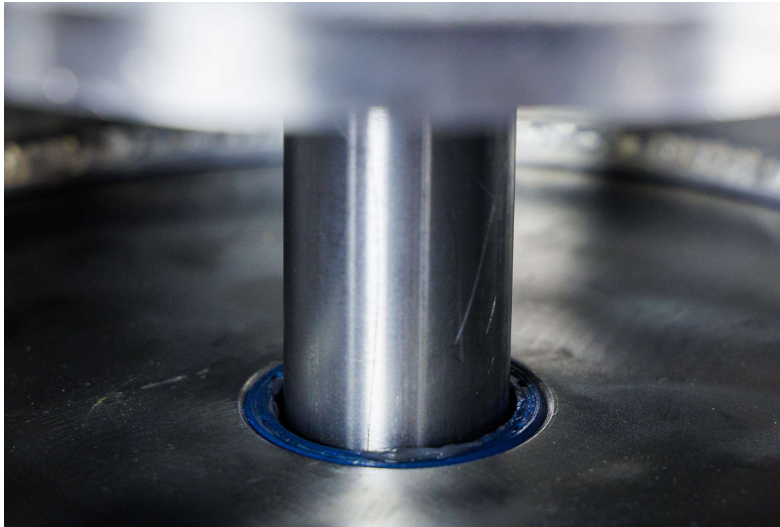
Close-up of the shaft seal through the inspection window. Grease should be applied to the shaft before it passes through the seal.
